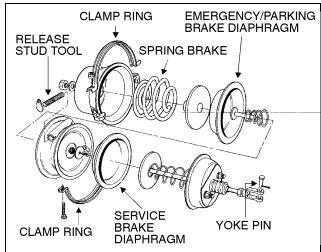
BRAKE AIR CHAMBERS ASSEMBLY
